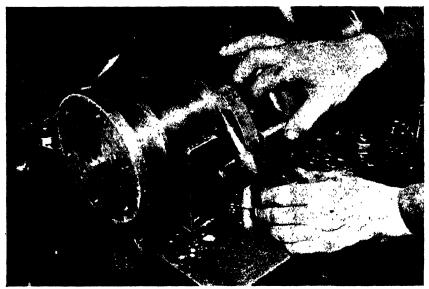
Drilling oilholes in a crankshaft (2) The template to mark off the oilholes. (A.E.C., Ltd.)
